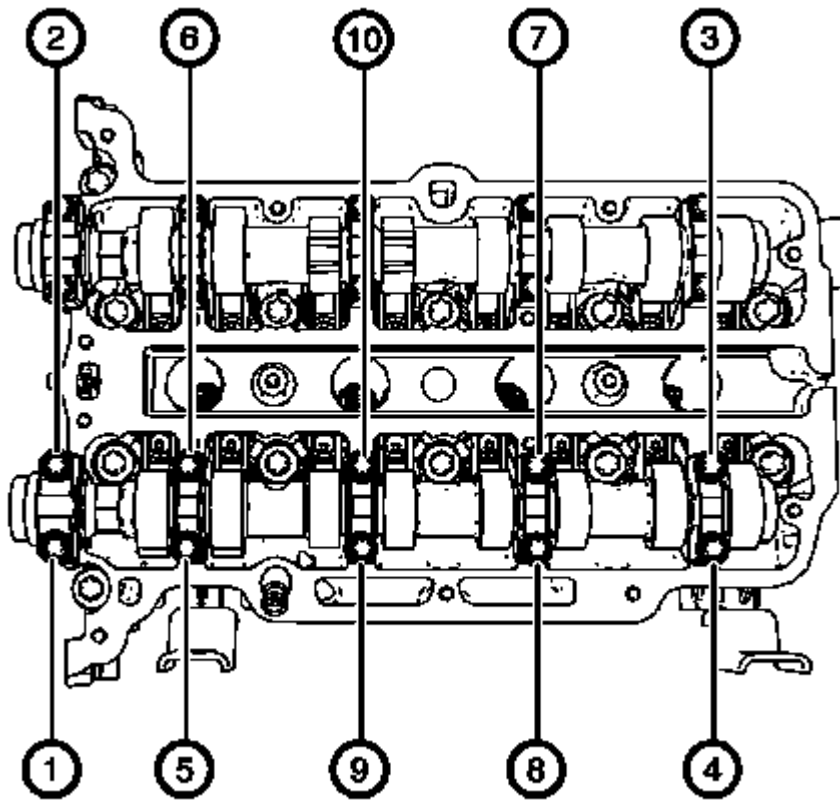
Exhaust Camshaft Bearing Cap Bolts Removal Sequence
